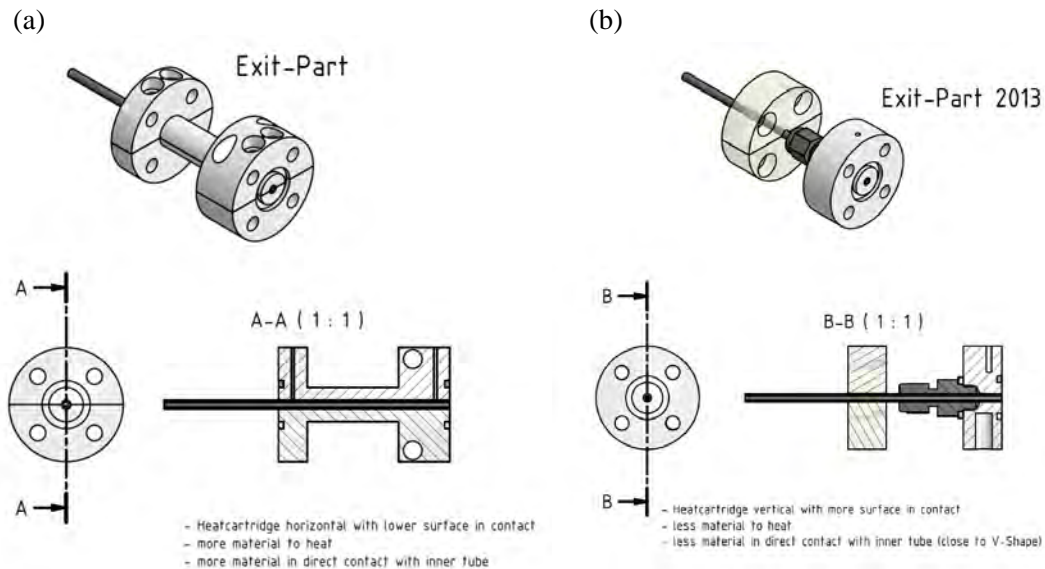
Aluminum heatcartridge covering the steel tube coming from the hot bath, in the original design with two Al pieces (a); and with a single Al piece (b).
